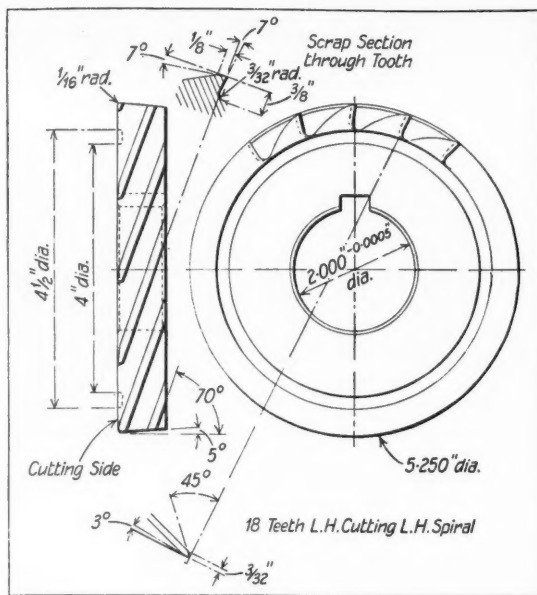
One of two cutters used for step-milling turbine blades. The second cutter is similar but the spiral and direction of cutting are of opposite hand
